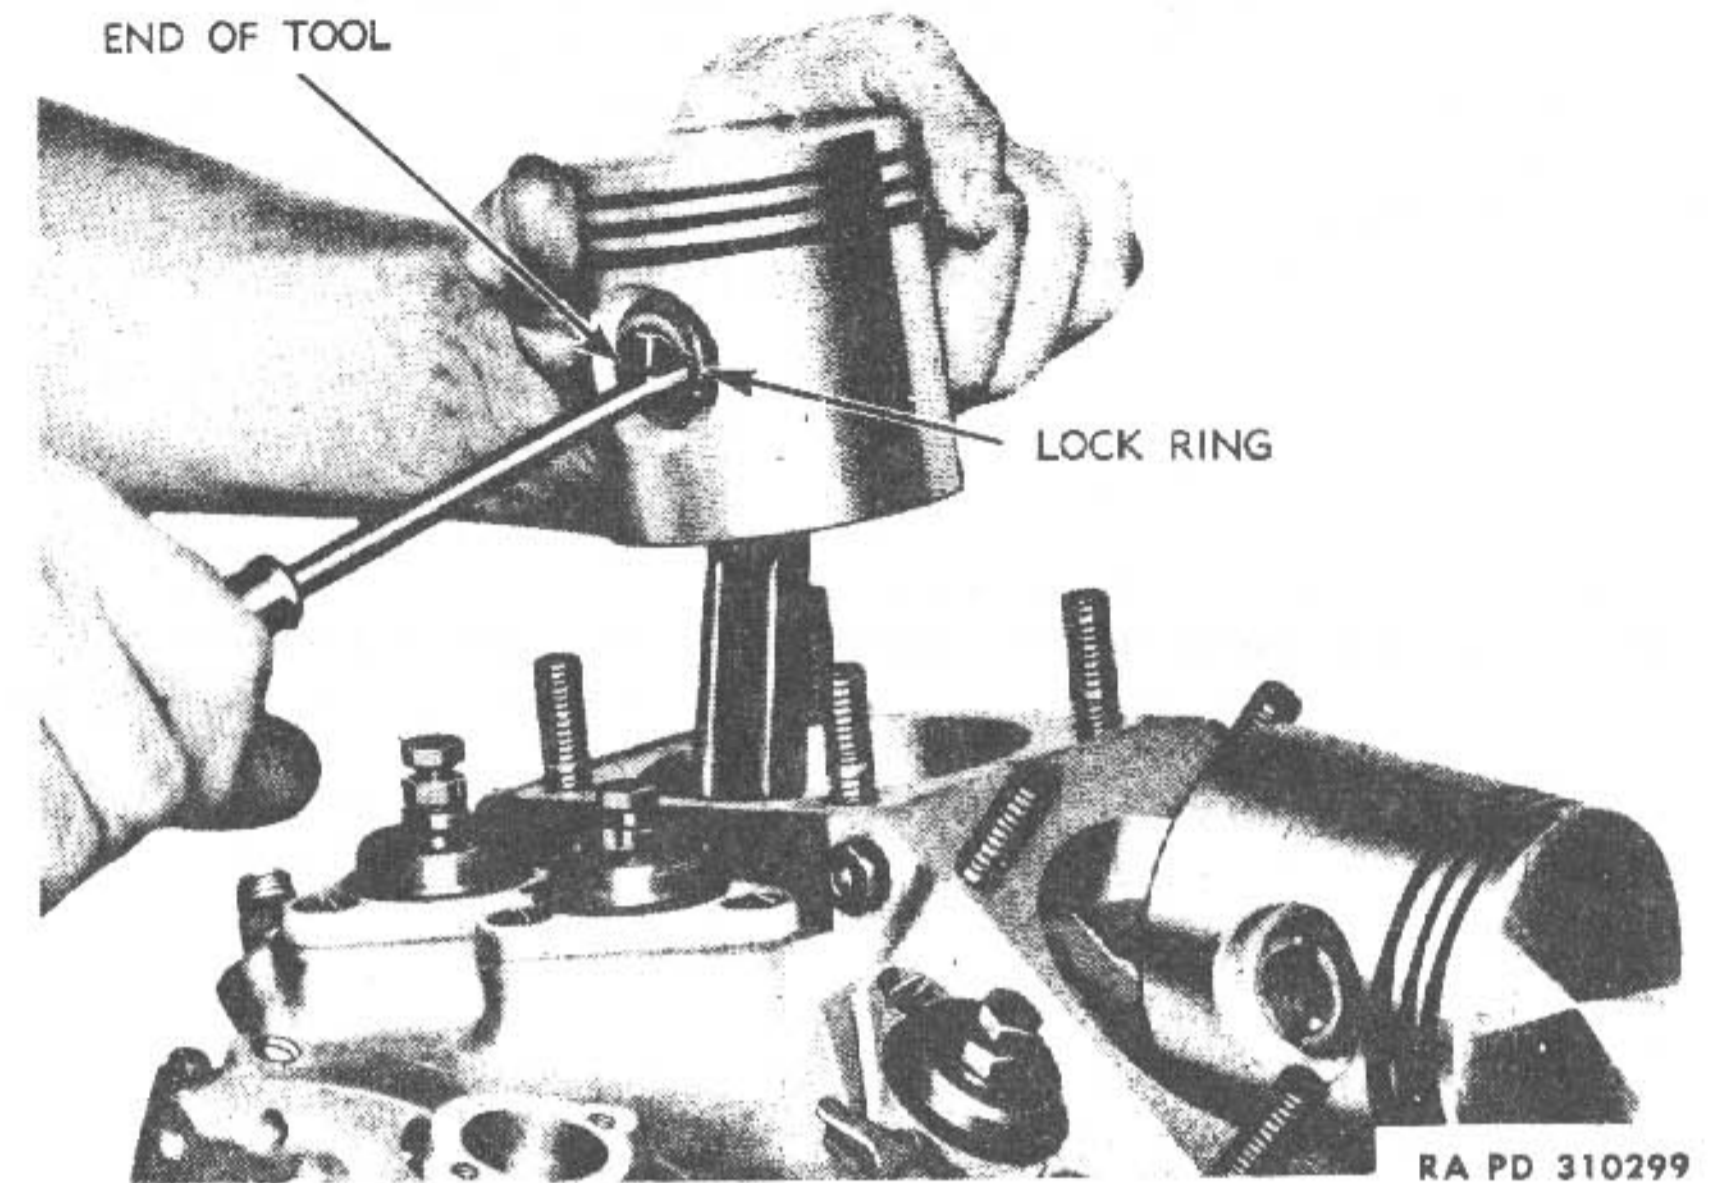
Removing Lock Ring from Piston Pin, Using Tool (41-T-3260)
